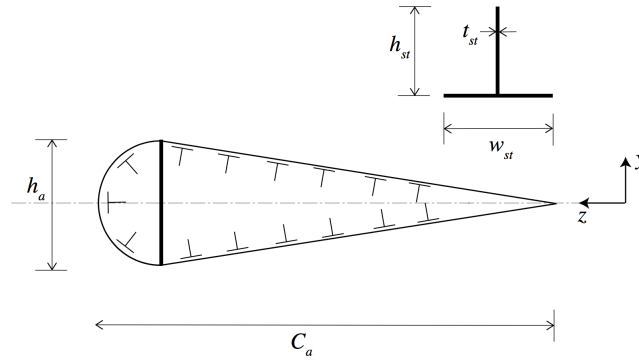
Cross-section of aileron and stiffener geometry, (van der Wal and Campen, 2018).
